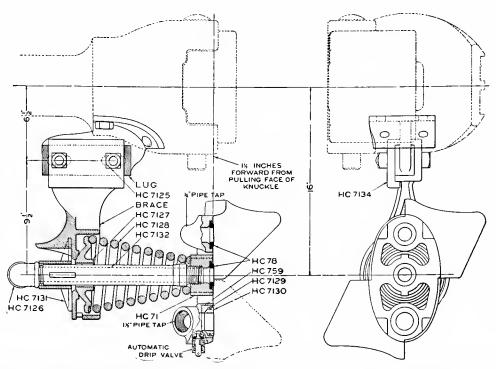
Passenger Connector for Air Brake, Signal and Steam Heat Pipes. New York Air Brake Company.
